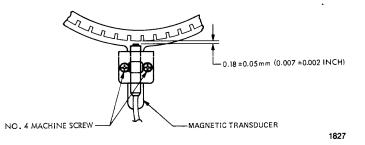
Lower Transducer Alignment, Front and Top Load
